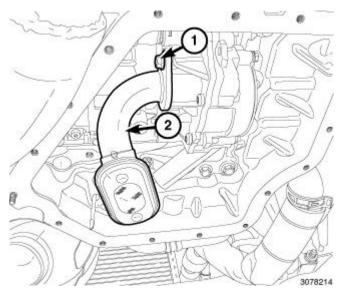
Oil Pump Pick-Up Tube & Bolt
